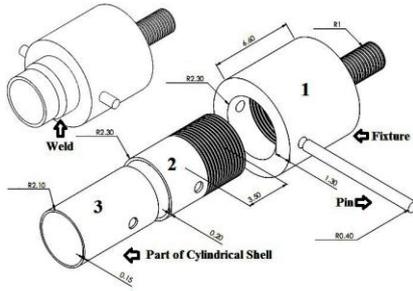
schematic layout of typical connections between shell and fixture through welding, thread and use of pin
